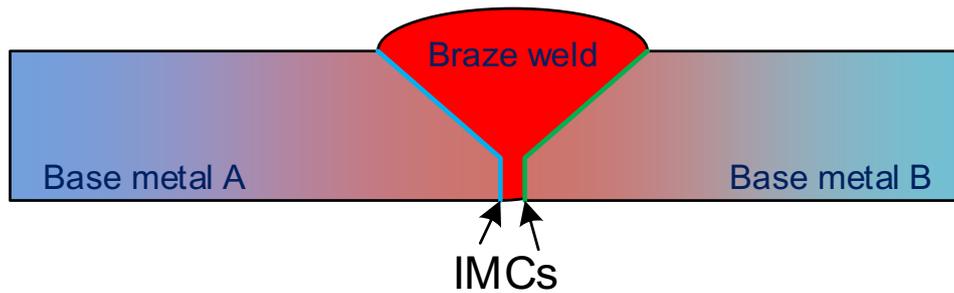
Schematic diagram showing braze welding joint
